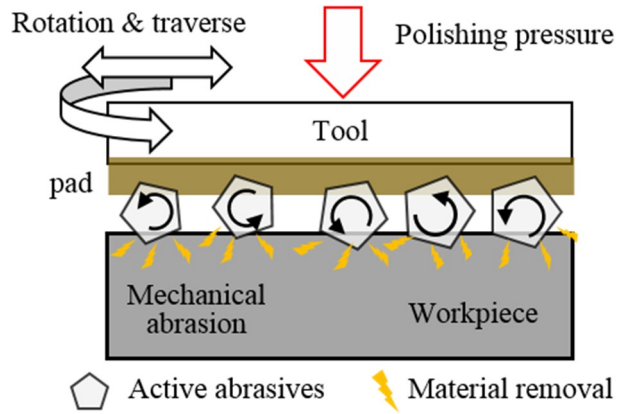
| Material removal mechanism of mechanical polishing of SiC
